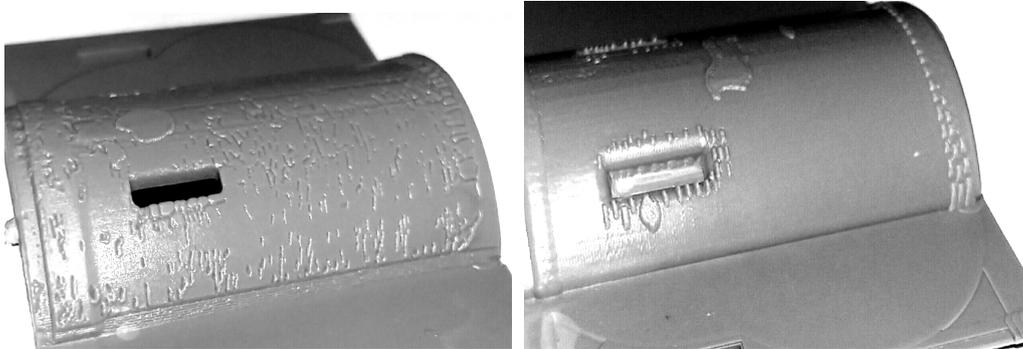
(a) Detail of North Wall Apse Injection Moulding ; (b) Detail of South Wall Apse;
